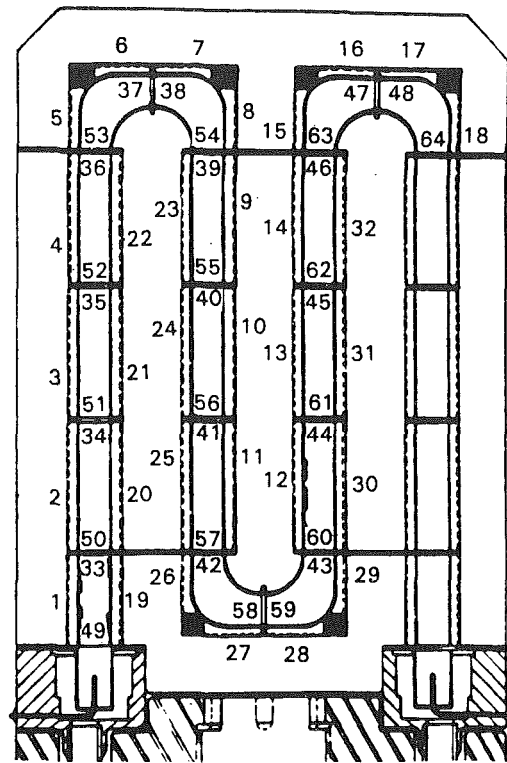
(a) Cross-sectional view of test surface identification plan for coolant passage heat transfer; side wall test section surfaces 1-32 are in plane perpendicular to view shown, test section surfaces 33-48 are on " $+$ " leading plane, test section surfaces 49-64 are on " $+$ " trailing plane
